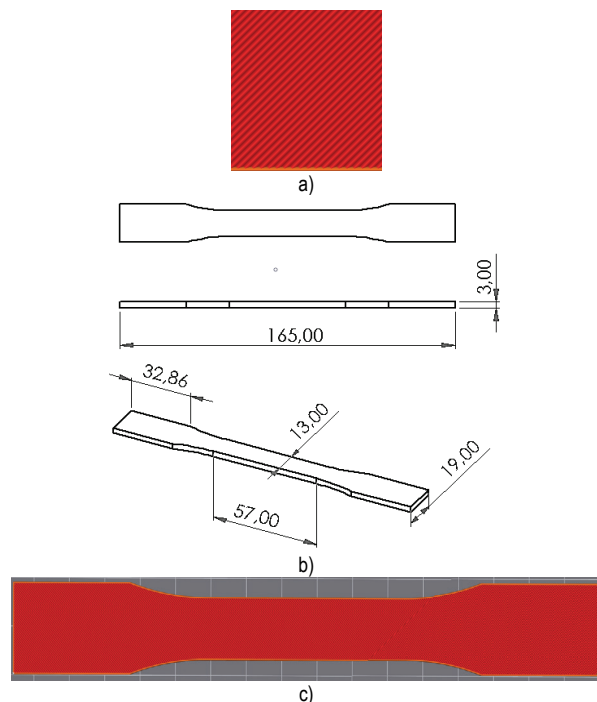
(a) Detailed view of the infill, (b) Geometry of the 3D printed specimen (measurements in mm), and (c) Slicing profile of the 3D printed specimen.
